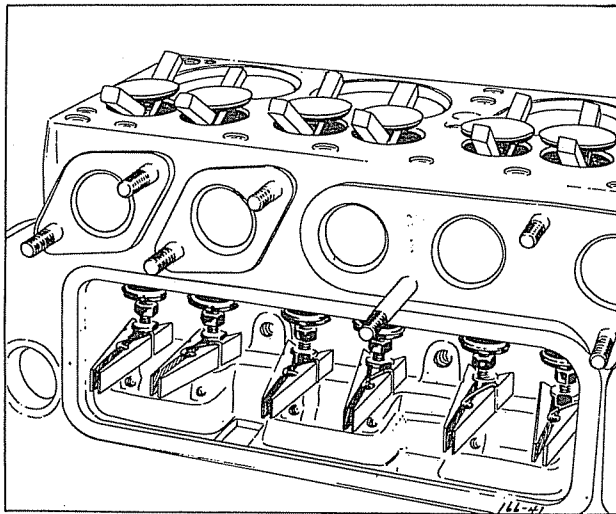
Holding up Valves and Tappets for Camshaft Removal.
